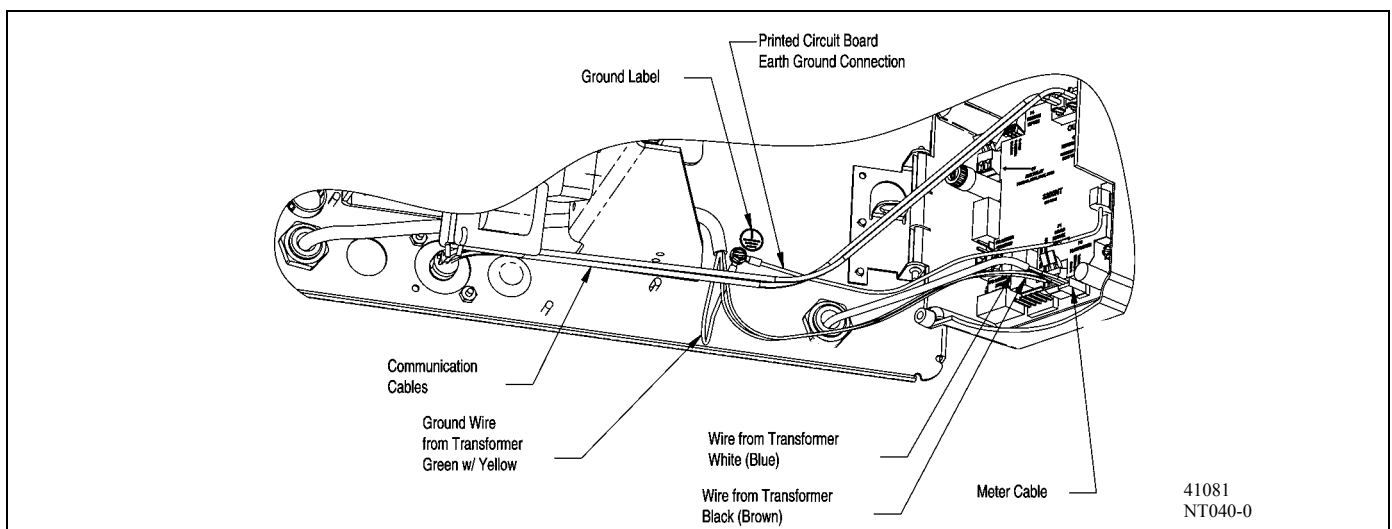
Installing Ground Wire on Transformer, 3150/3900 Valves
